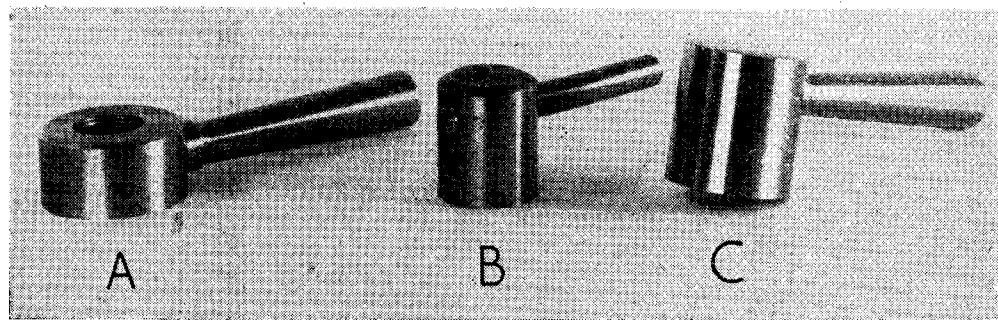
"A"—open-ended clamp lever; "B"—cap-nut with through handle; "C"—cap-nut with threaded handle
